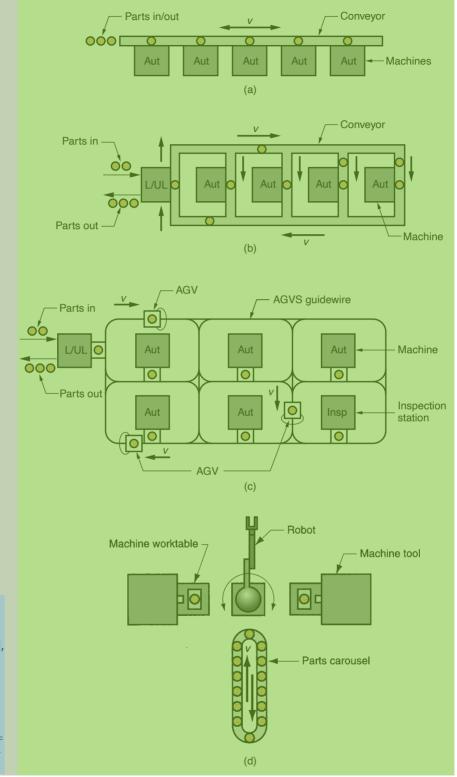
Four of the five FMS layout types: (a) in-line, (b) ladder, (c) open field, and (d) robot-centered cell. Key: Aut = automated station; L/UL = load/unload station; Insp = inspection station; AGV = automated guided vehicle; AGVS = automated guided vehicle system.
